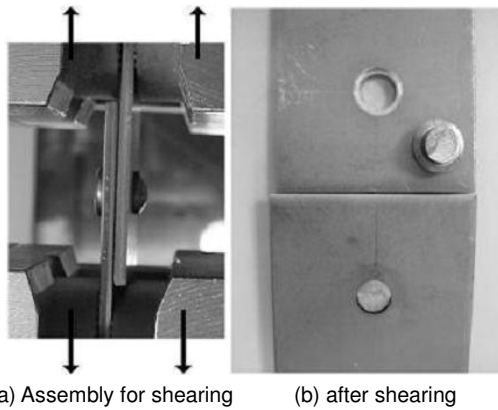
Shearing of the riveted joint (a) and the sample (b) after shearing test in the experiment
